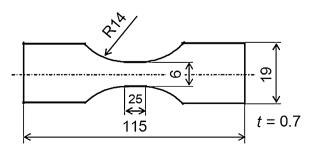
Shape and dimensions of specimen in tensile test (mm).
